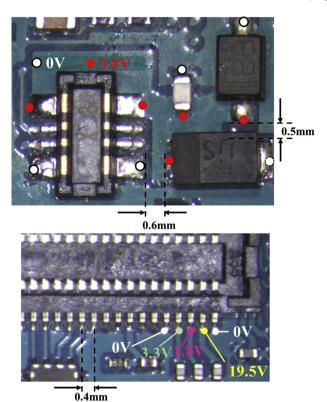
Examples of smartphone PCB parts with applied voltage.
